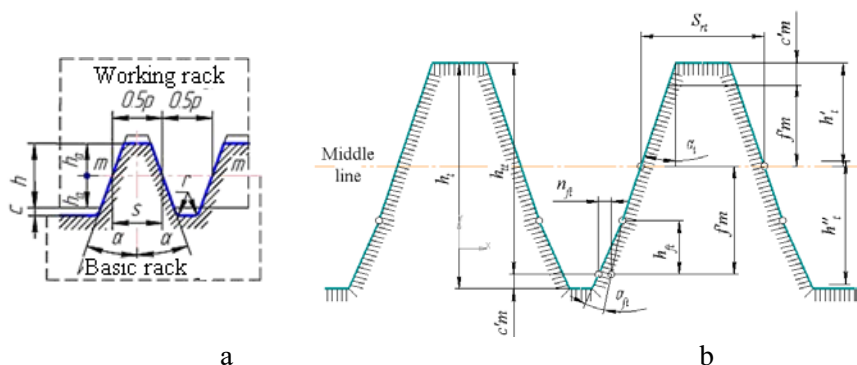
The original contours of the gear wheel (a) and the tool (b)
